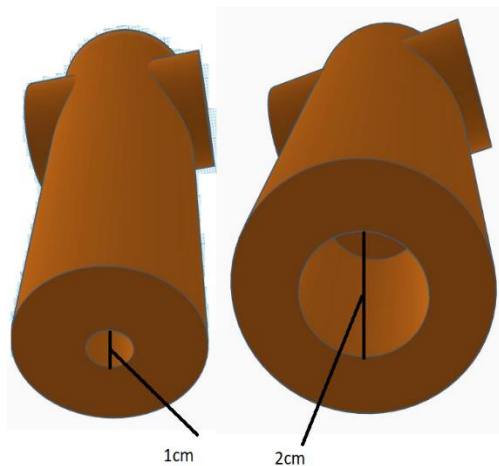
a) top panel shows peg design b) shows object design with different grasping surface size and hole diameter: 3D printed using Ultimaker.
